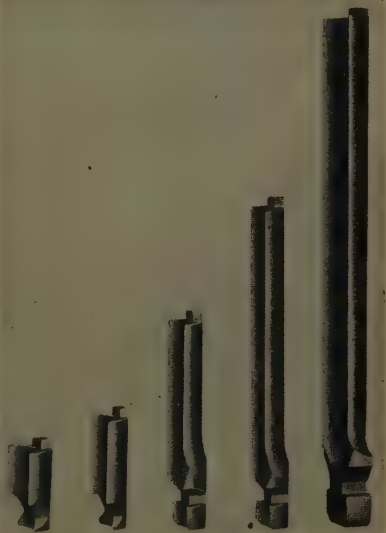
METHOD OF ATTACHING BUCKETS AND SHROUD RING
